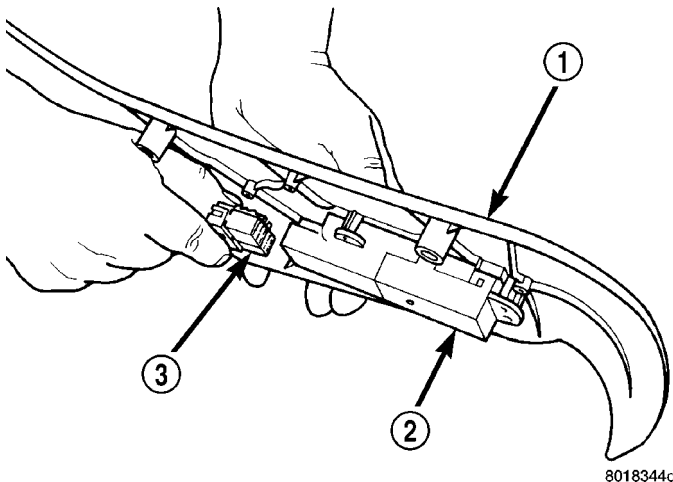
POWER SEAT SWITCH WIRE CONNECTOR
